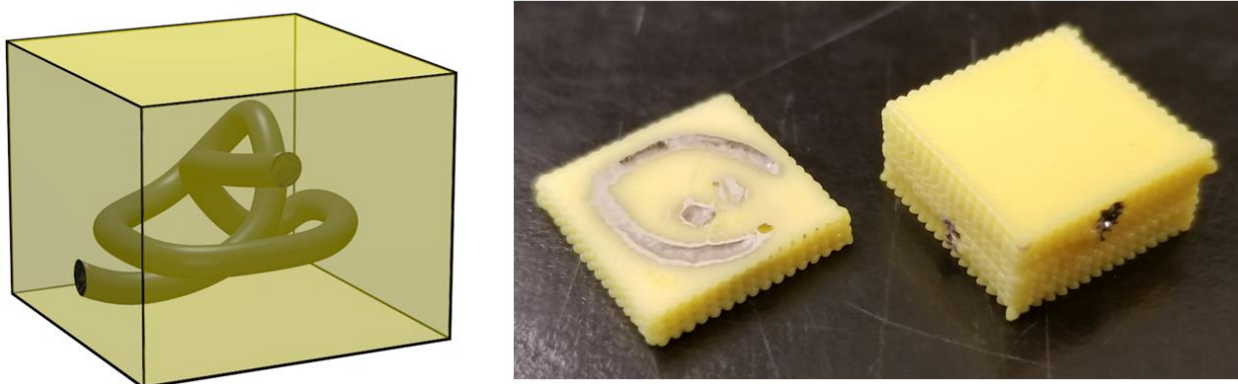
3DP pretzel line using hybrid slicing tool. (Left) the CAD design for the pretzel. (Right) Hybrid 3DP partial build and full build.
